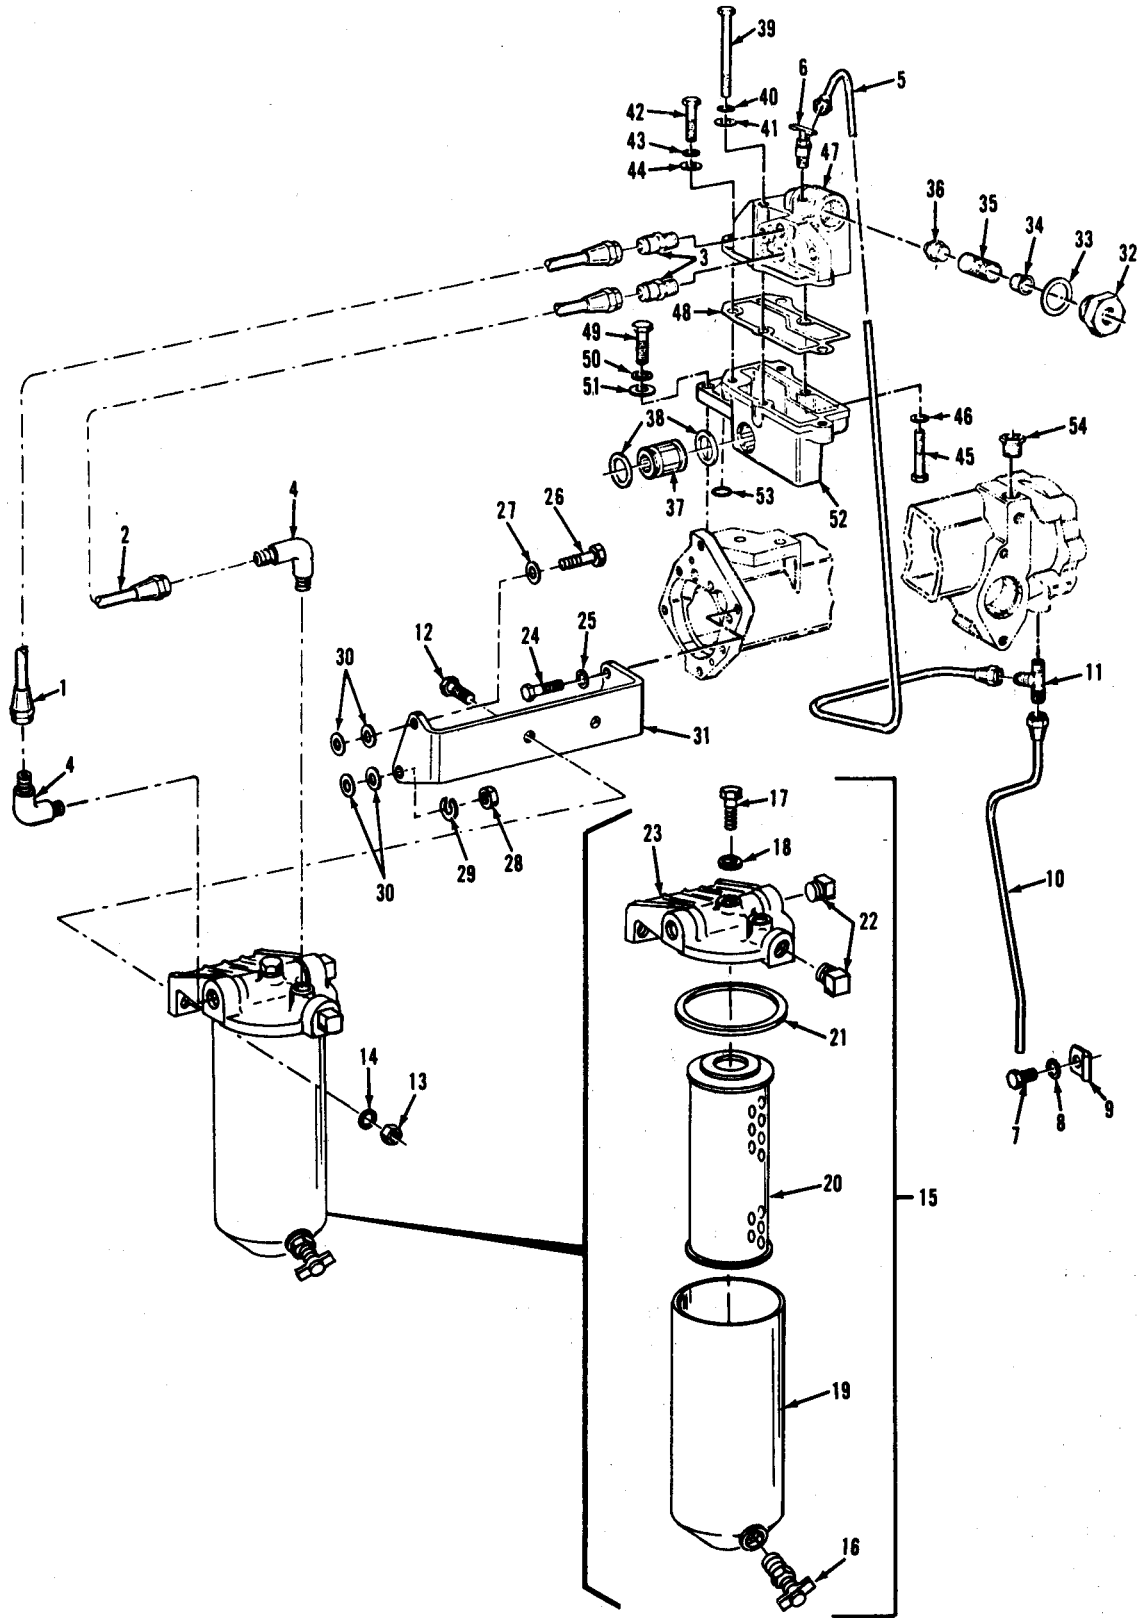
Secondary fuel filter and relief valve group, exploded view
